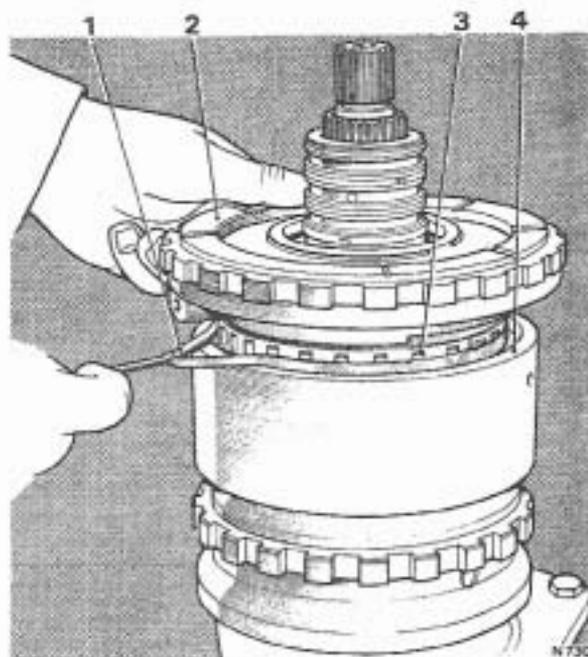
FITTING THE CENTRE SUPPORT TO THE REACTION CARRIER (SPRAG CLUTCH)
